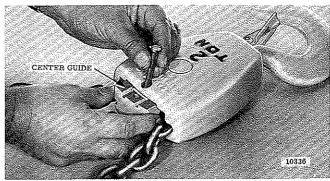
Removing Chain Center Guide from 2 and 3 Ton Lower Block Assembly (Coil Chain Model)
